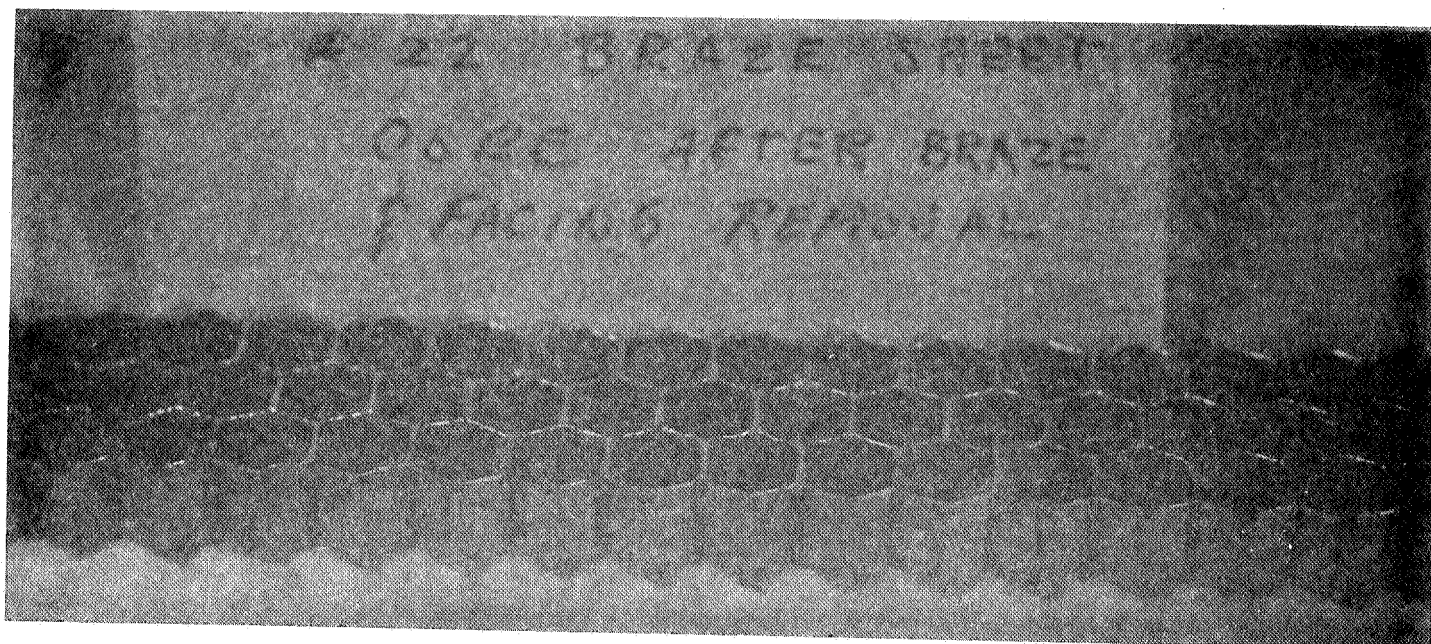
Brazing Sheet No. 22 Core Sectioned from Brazed Panels:
